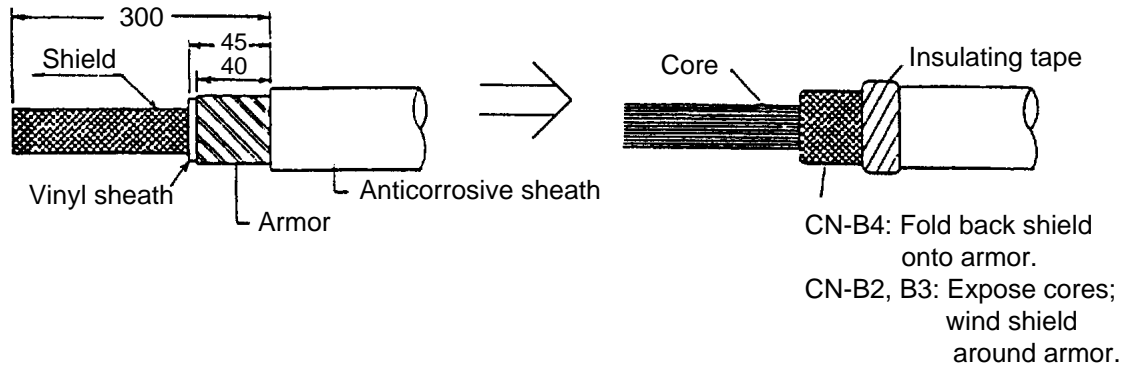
Fabrication of cables 10S1258-1, 10S1260
